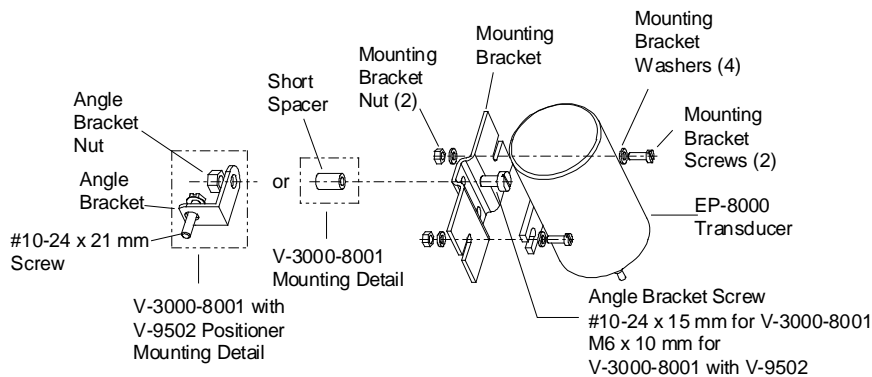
Mounting Detail for V-3000-8001 Actuators With or Without a V-9502 Positioner
